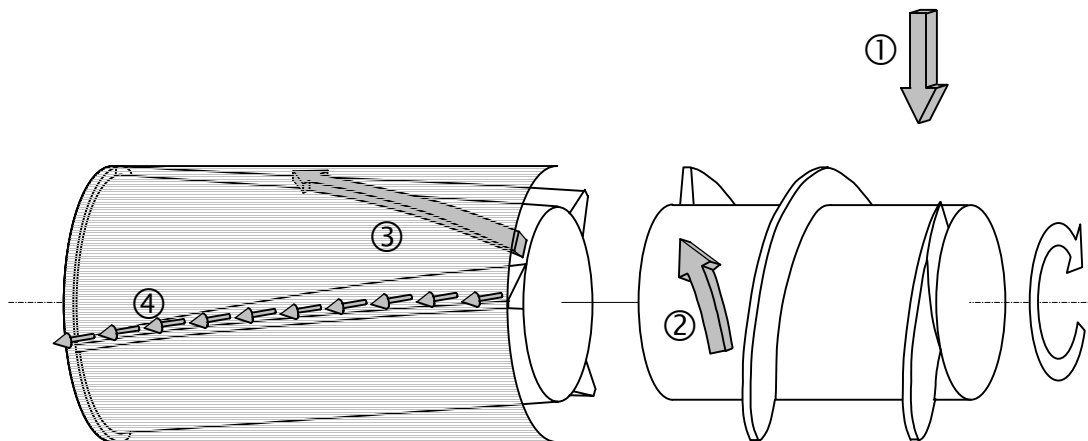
Exploded drawing of one half of a twin-screw radial screen extruder
